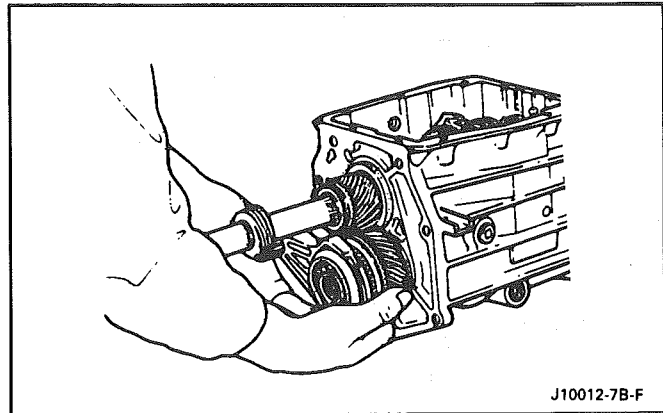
Fifth Gear Synchronizer (Removal and Installation)
